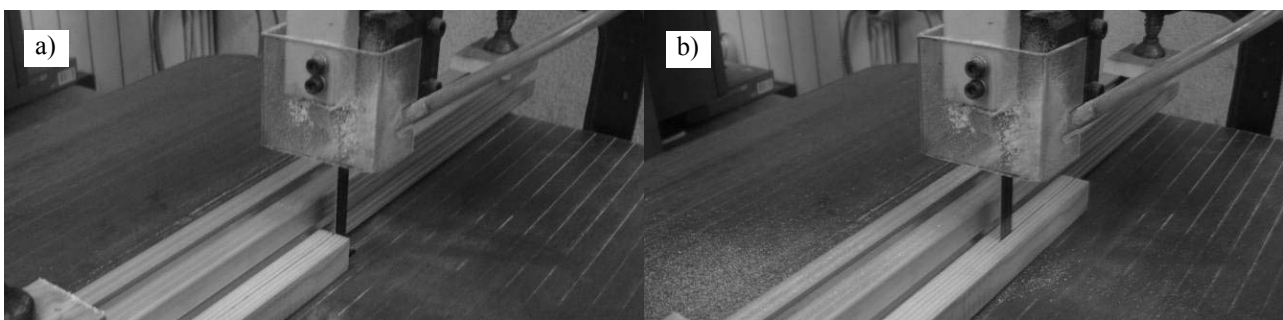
Cutting setup and specimen before (a) and after cutting the crack (b).
